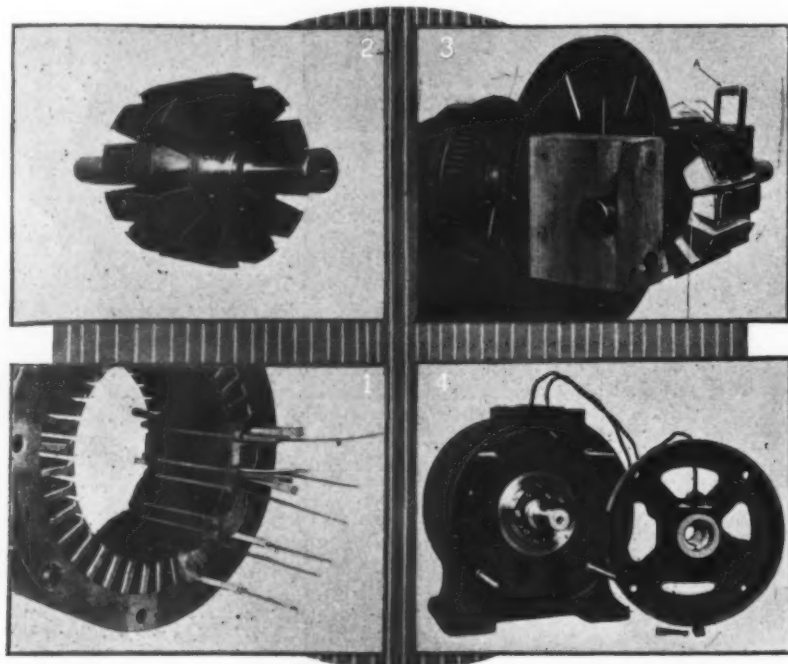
Rewinding the stator. Fig. 2.—New rotor core on shaft. Fig. 3.—Winding the rotor. Fig. 4.—Generator complete.
